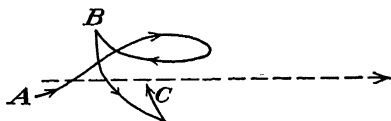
Movement of electrode on single-pass overhead fillet weld.
